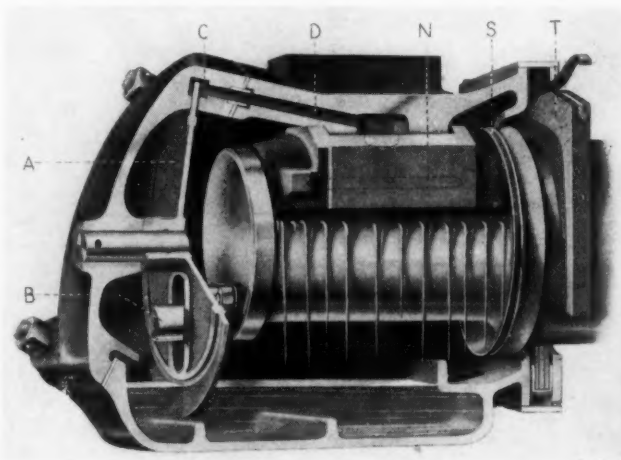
AUSTRIAN FRIEDMANN-TYPE PRESSURE LUBRICATOR FOR JOURNAL BEARINGS
